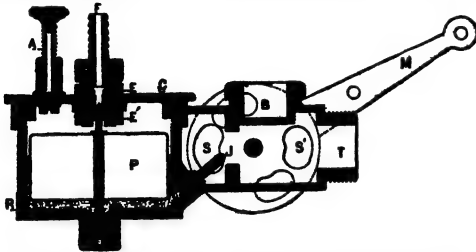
SIMPLE MODERN CARBURETTER, WITH AUTOMATIC ADJUSTMENT ACCORDING TO THROTTLE OPENING.
